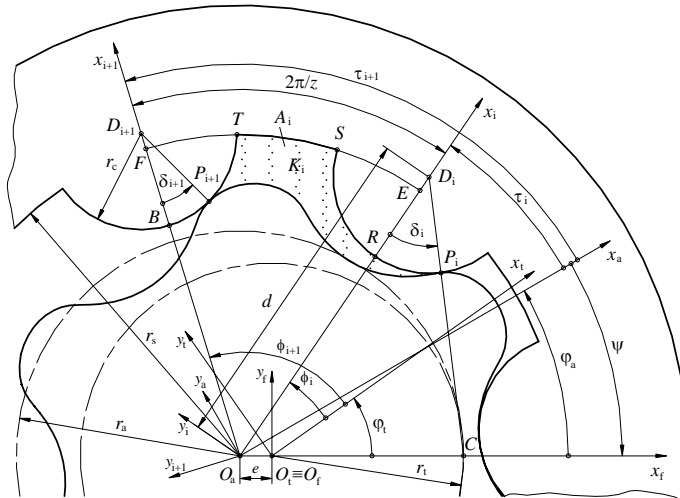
Schematic presentation of the gerotor pump gear pair with basic geometrical dimensions
